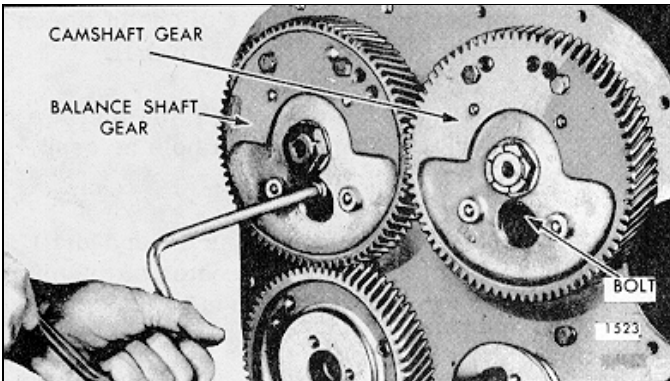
Loosening Nut on Camshaft or Balance Shaft
